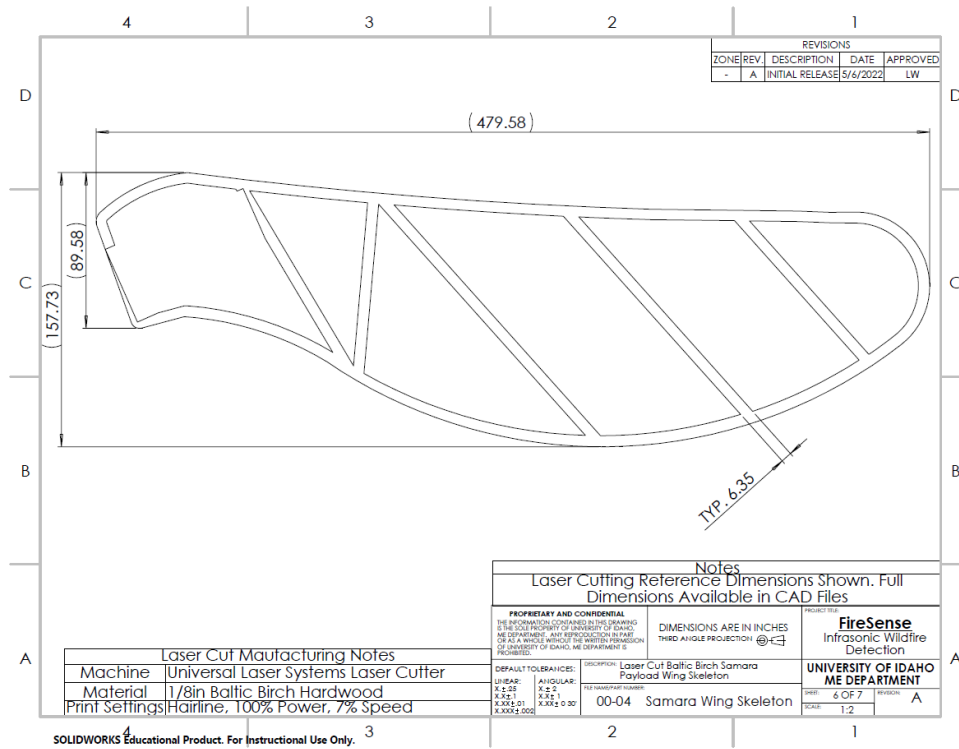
Technical Drawing Package Sheet 6, Samara Wing Skeleton
